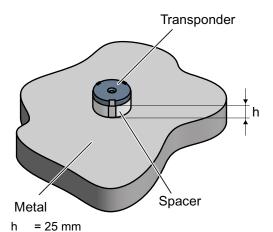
Mounting the MDS D126 / D426 on metal with spacer
